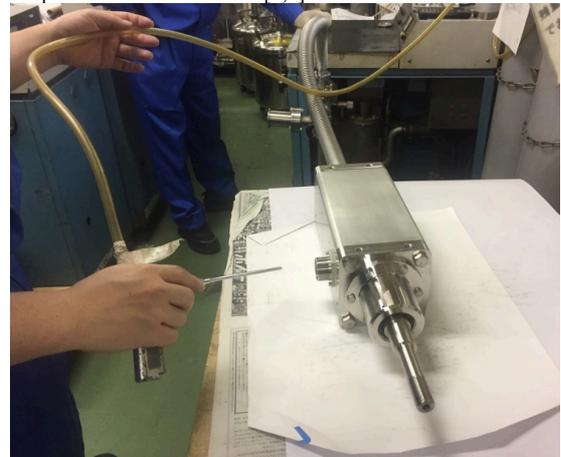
After assembling the generator, we performed Helium gas-leak test to confirm vacuum seal performance.
